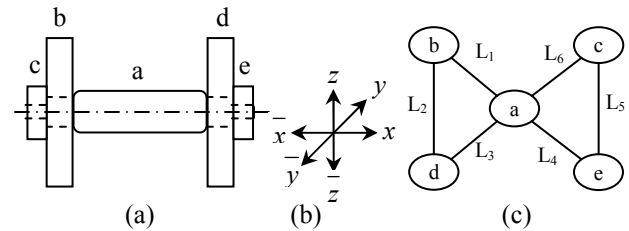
(a): A simple example of a product (Grinder assembly); (b): Directions for assembly or disassembly; (c): Liaison graph model of grinder. [a-shaft, b-blade; c-nut, d-blade, and e-nut]
